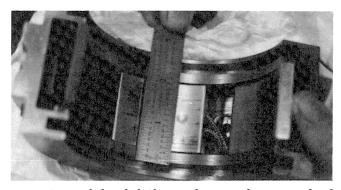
Dimpled Radial Tilting Pad Bearing from Centrifugal Compressor Bearing Retainer Assembly. Dimples due to air voids from pretinning and babbitt puddling over temperature sensor—1980.
